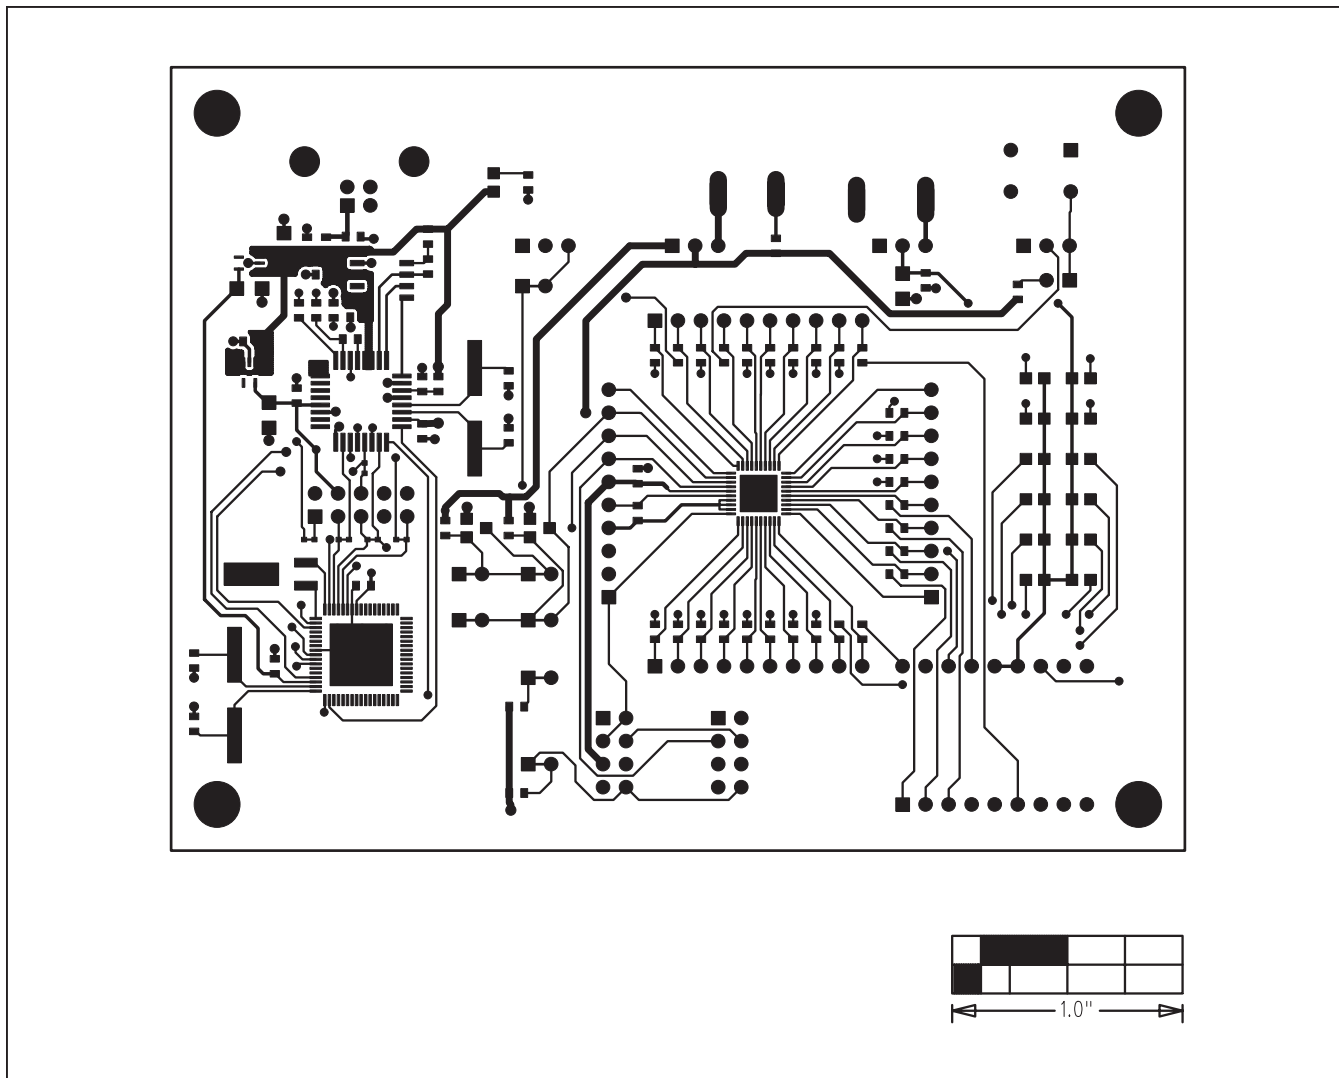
MAX6956 EV Kit PCB Layout—Component Side
